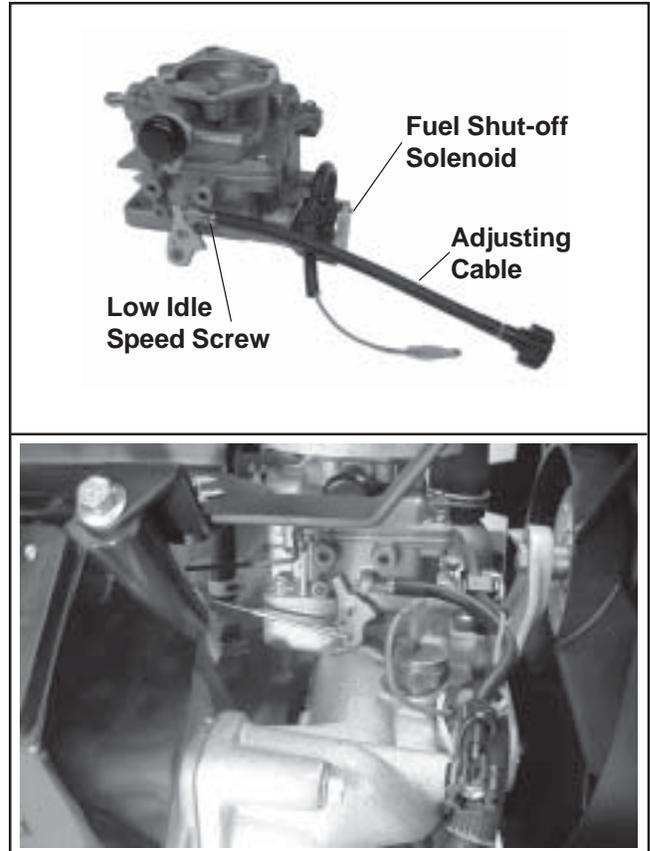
Carburetor with Adjusting Cable on the Low Idle Speed Adjustment Screw (Early Models).
